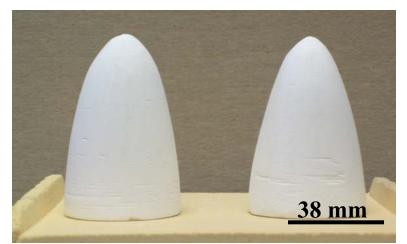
Hollow ogive cones (after surface finishing) fabricated with the extrusion force controller.
